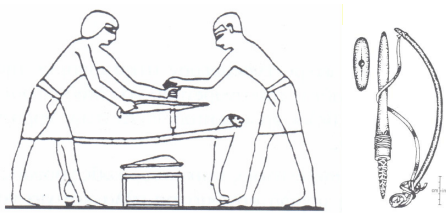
Carpenters in Egypt using the bow-drill, probably the first mechanical tool ca.2800 BC [3-4].
